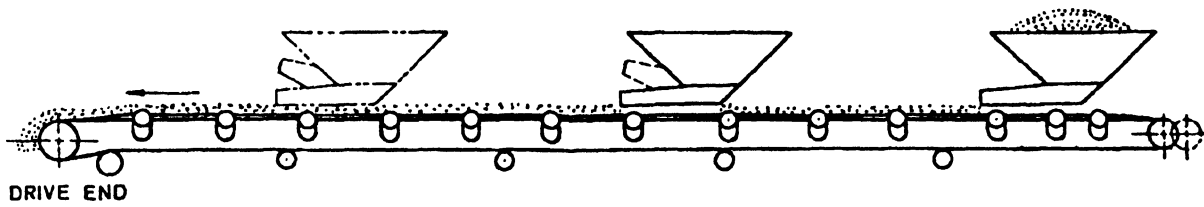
A Horizontal or Inclined Conveyor — Loaded at one end and discharged at other end may also be loaded at intermediate points through fixed or movable spouts
